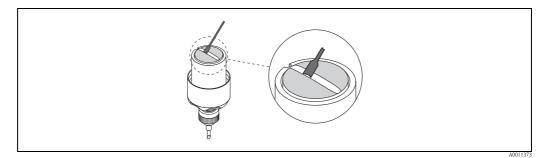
Coating the contact surfaces of the sensor with coupling fluid
